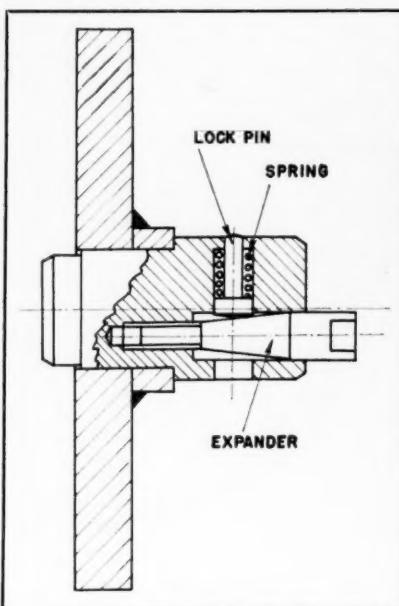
When concentricity is no particular problem and when the hole dimensions of the workpiece do not have a very close tolerance, a fixture of the design shown herewith is more economical than a fixture of the type shown in Fig. 1.
